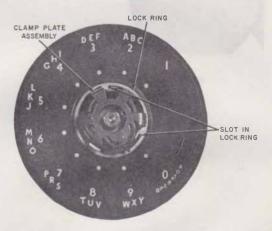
Fingerwheel and Finger Stop Removed to Show Lock Ring
